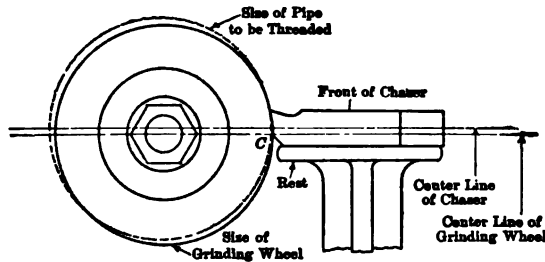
Proper method of grinding chasers to secure clearance in lead or throat. The chaser is raised or lowered according as the design of the die requires. *C* indicates the amount of clearance which will be obtained. See also Figs. 28 and 29.
